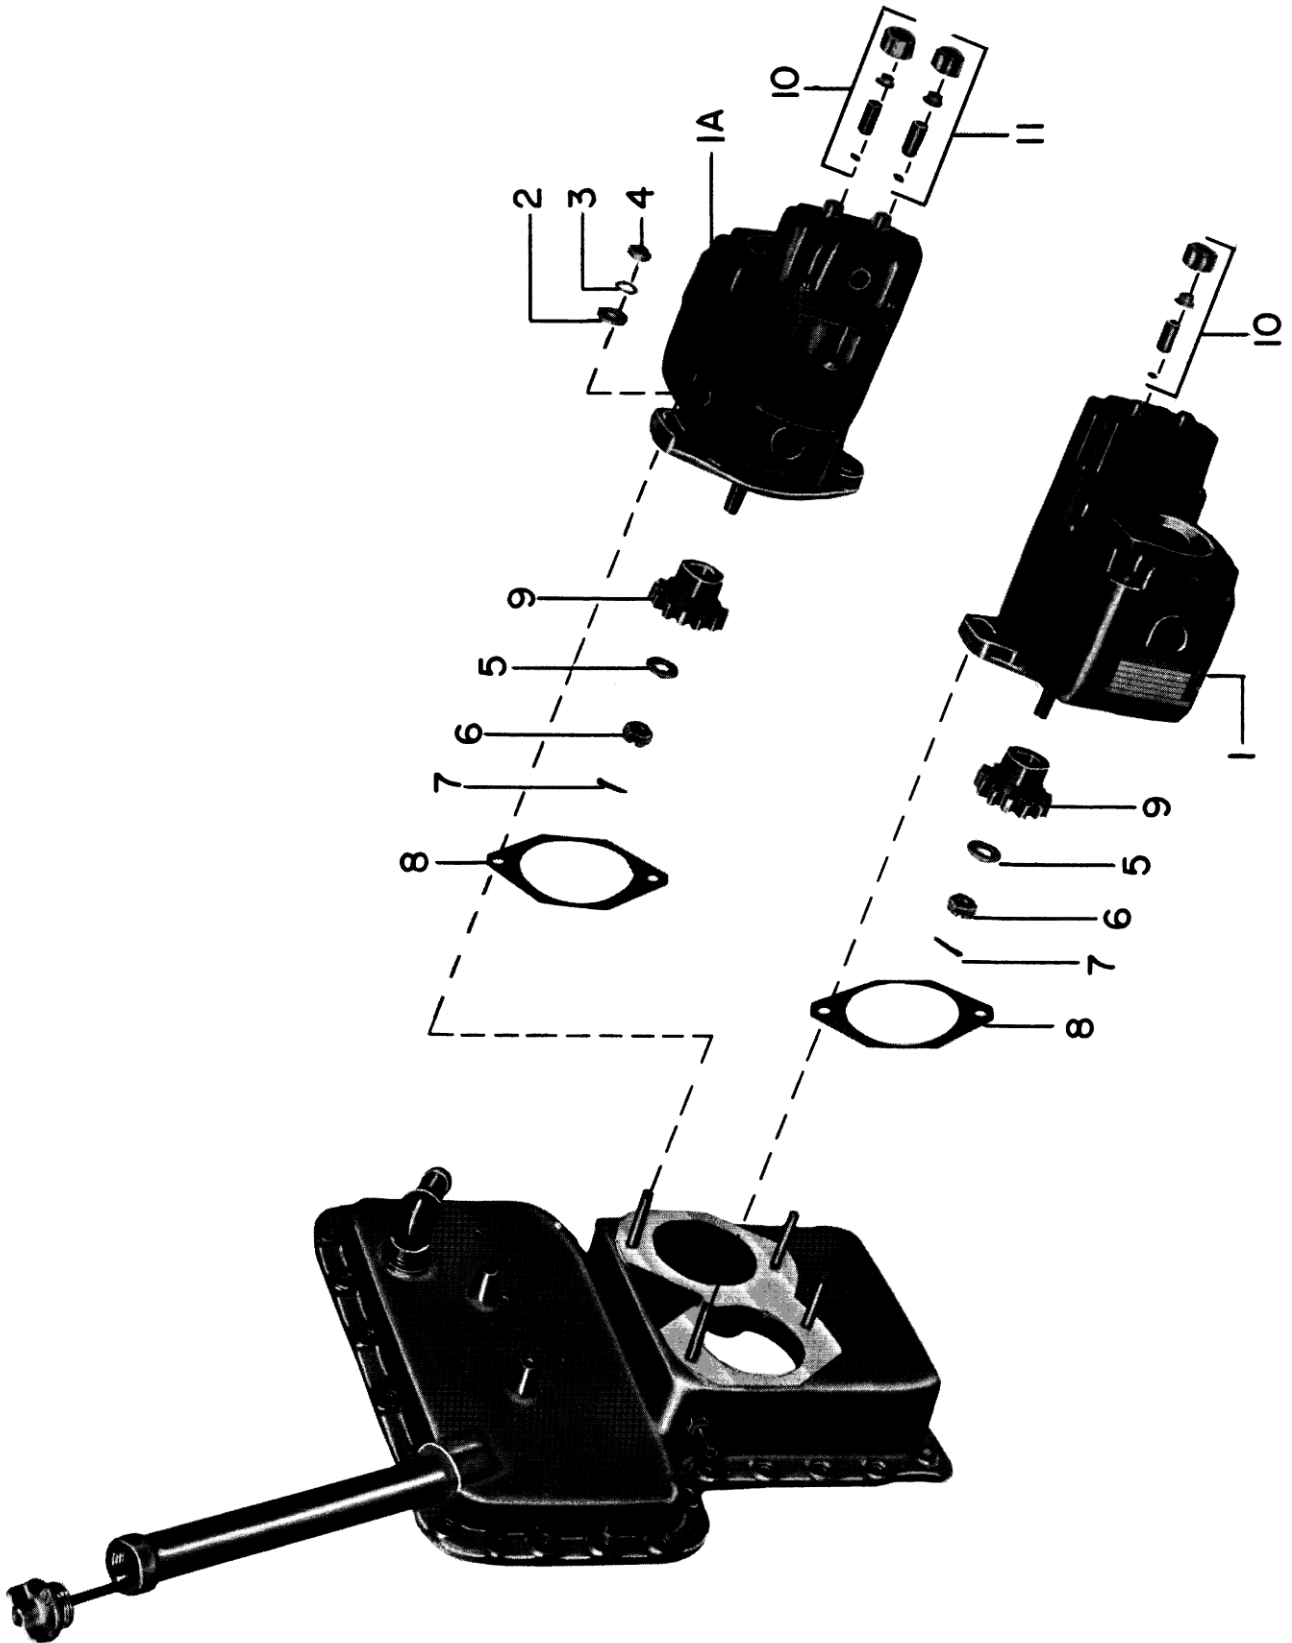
Magnetos and Magneto Drives Group (S4LN-21)
